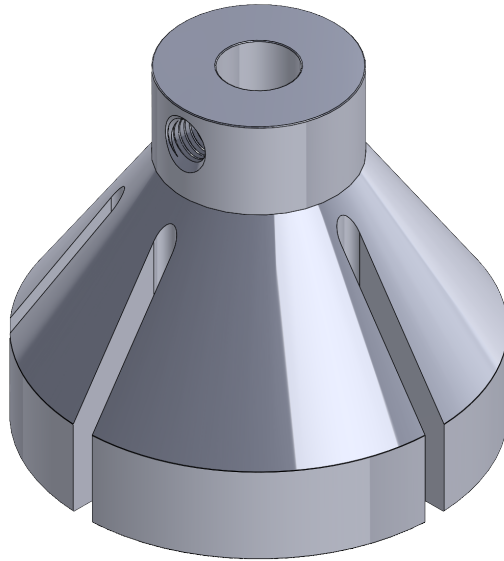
Flat slotted push-rod head with diameter of approximately 58.7 mm.
